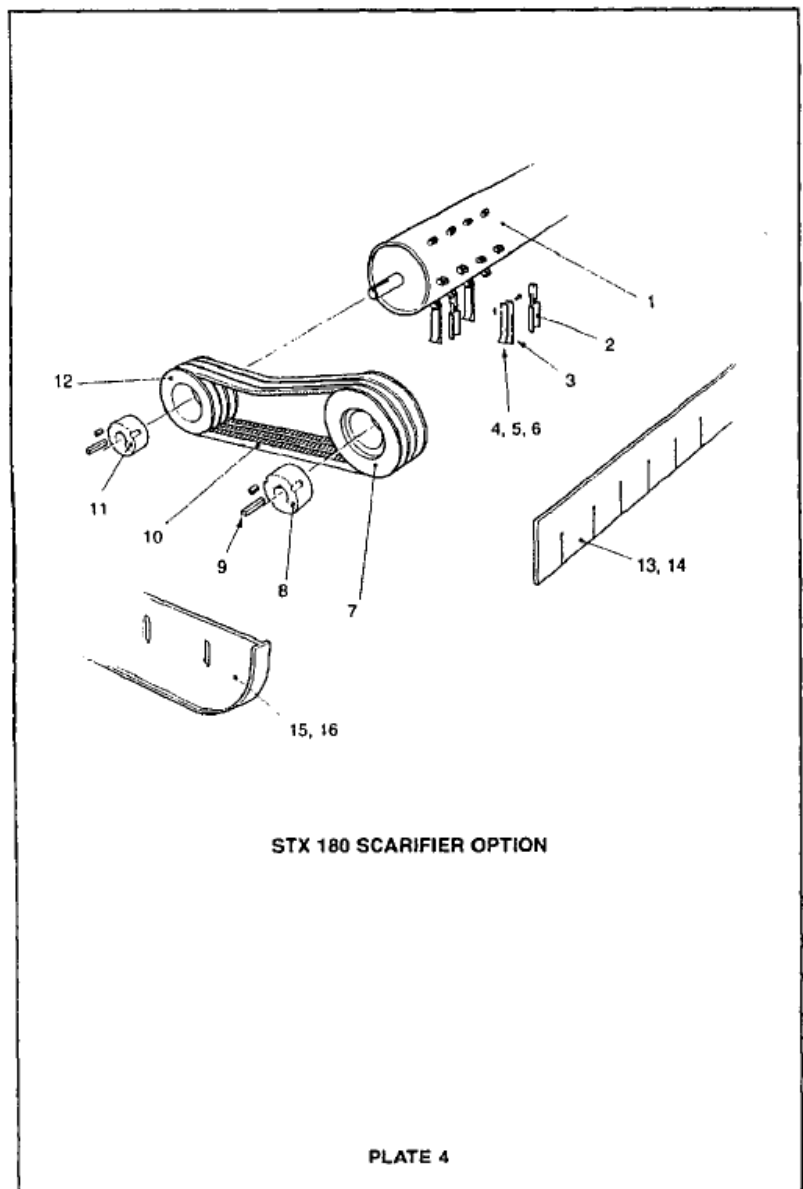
STX180 SCARIFIER OPTION PARTS LIST
